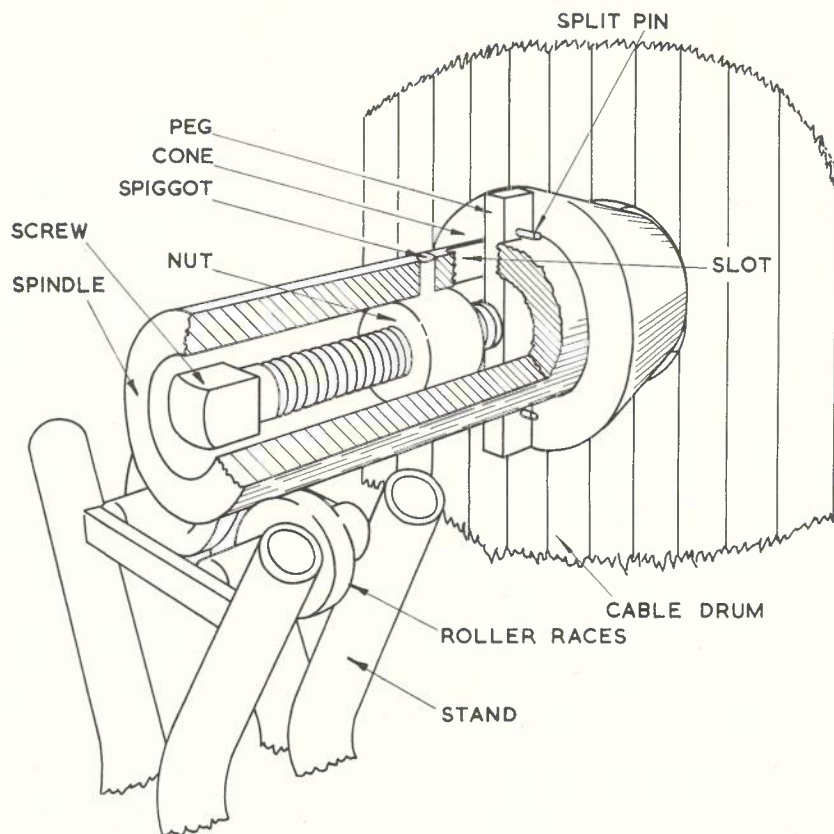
Tubular Spindle for 8 Ton Cable Drum.
